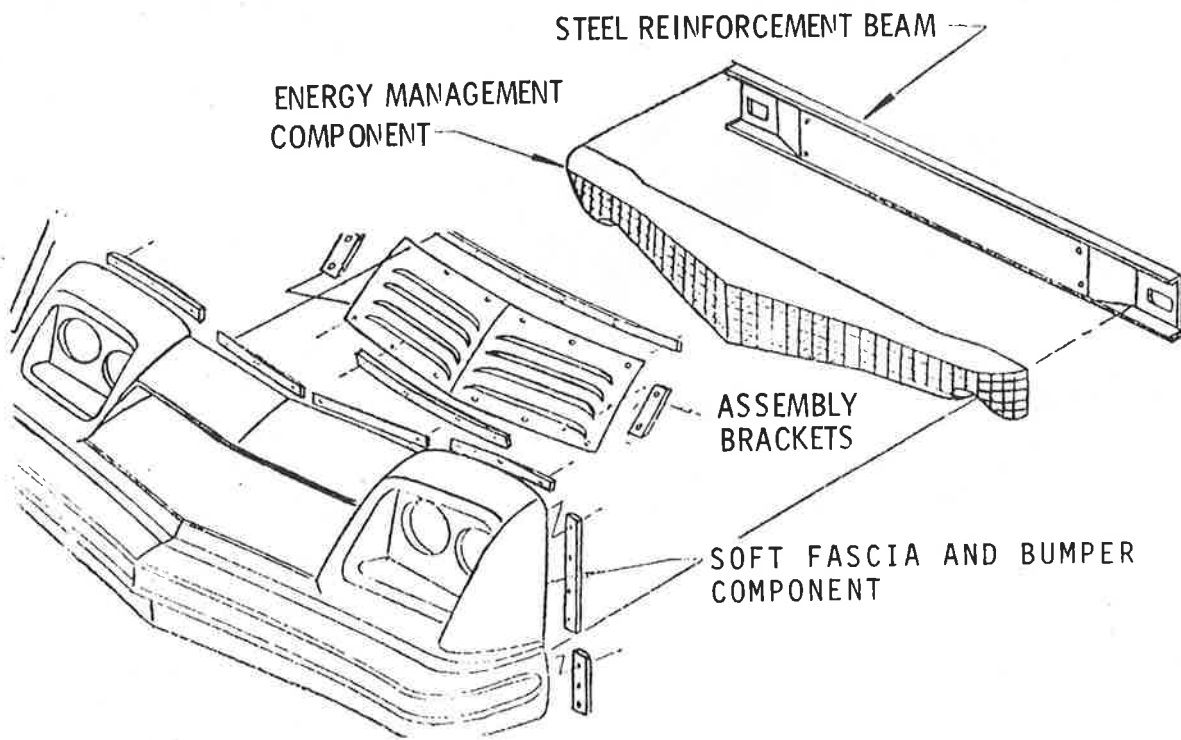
SOFT FRONT END AND BUMPER COMPONENTS
